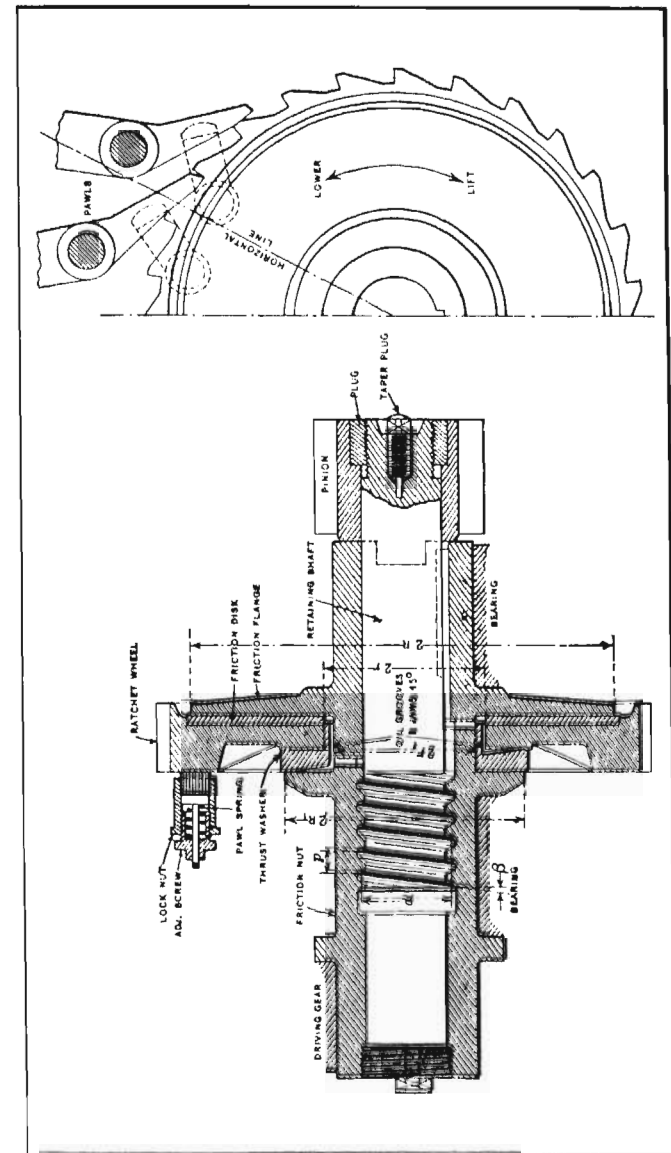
Another Design of Weston Load Brake for Cranes and Other Hoisting Machinery
